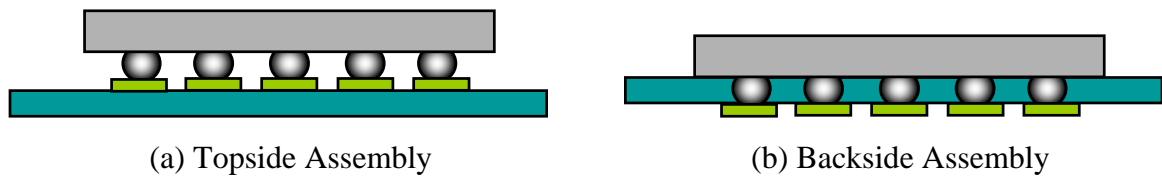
Illustration of Topside Assembly and Backside Assembly
